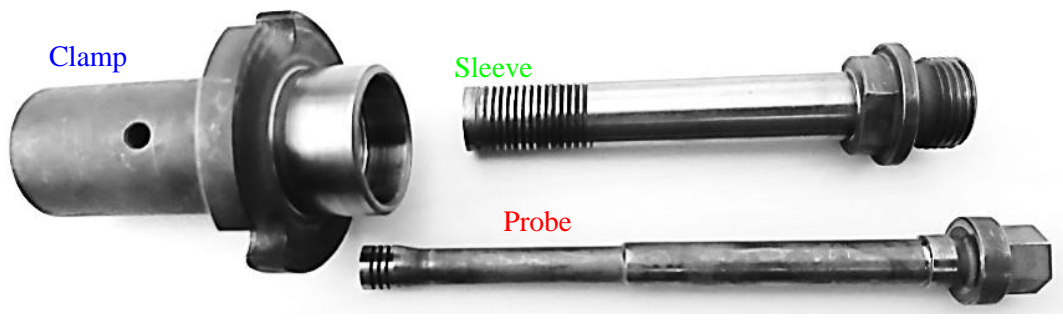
Appearance of the three-piece tool system used to perform the Refill-FSSWed lap joints.
